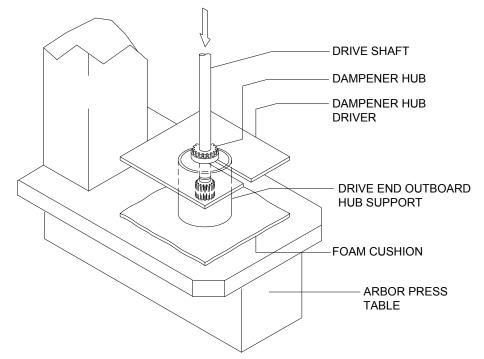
Remove the Dampener Hub from the Drive Shaft
